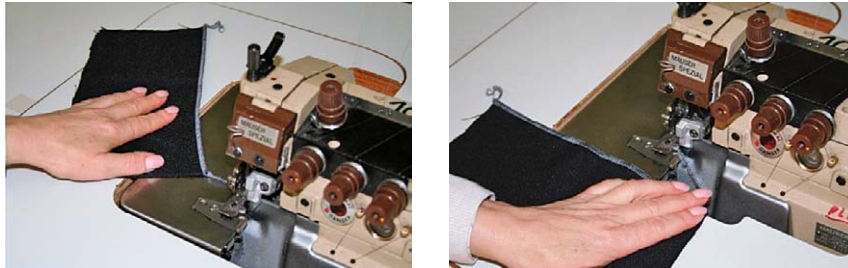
Representation of the sequence of motions for cutting off the thread with thread trimming device
